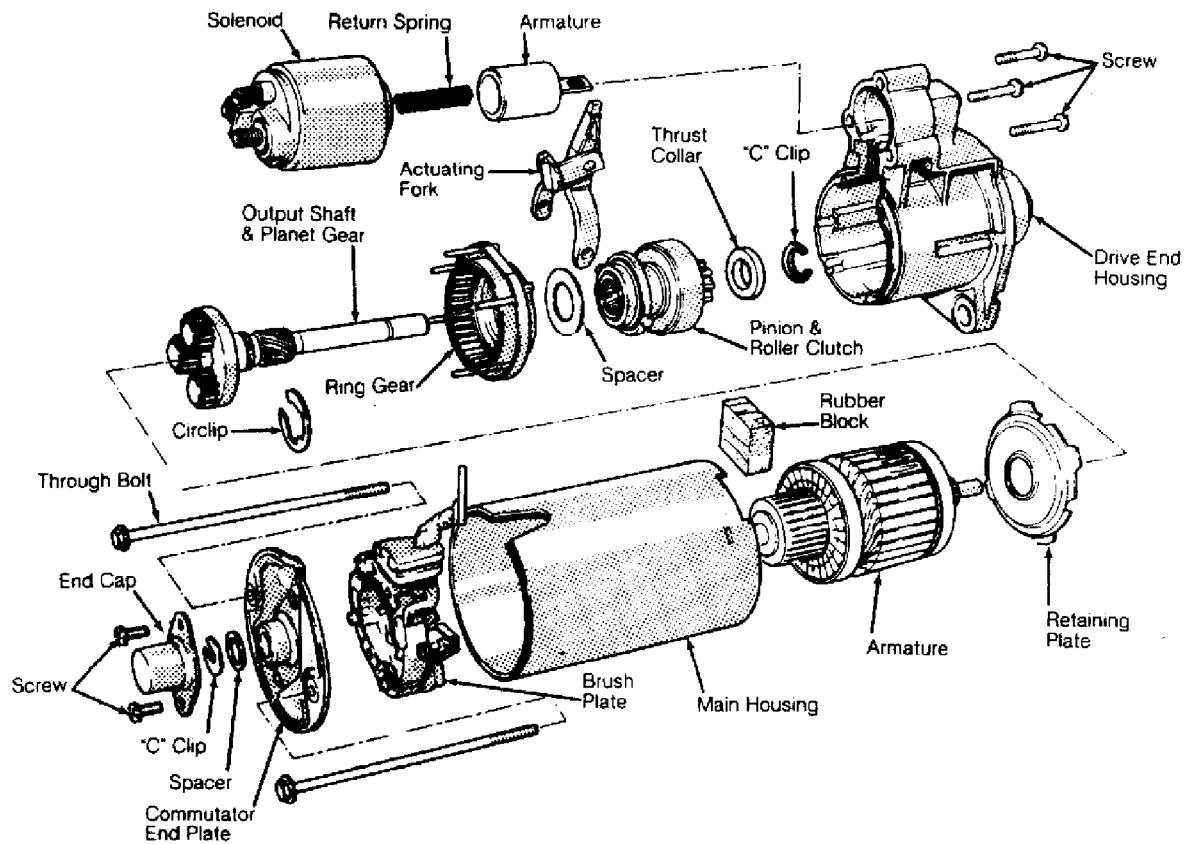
Exploded View of Reduction Gear Bosch Starter
